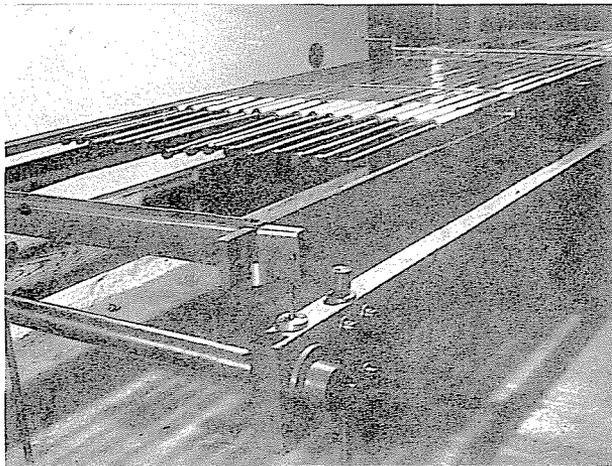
Manufacturing apparatus for wall elements, ready for gypsum pouring.
